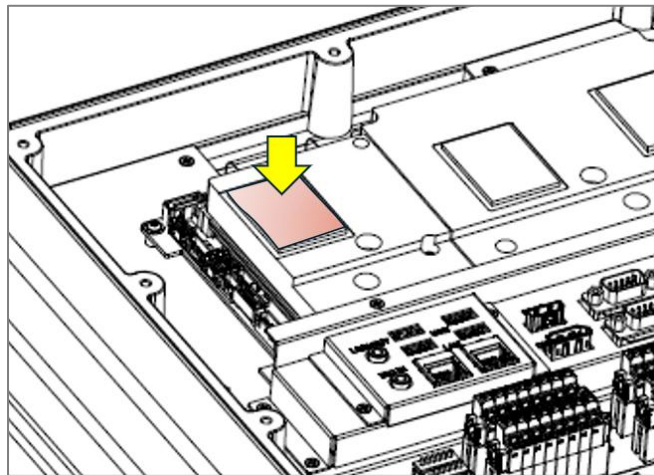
Attaching Thermal Pad onto M.2 Heatsink
